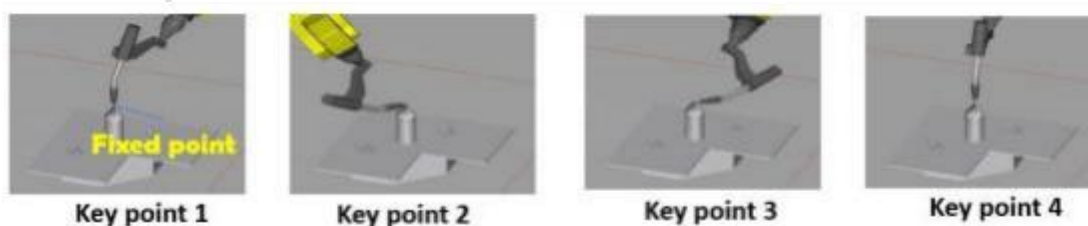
The sharp cone end of the workpiece is used as the reference point to establish the tool coordinate system
